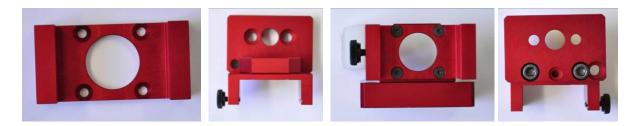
Camera holder (left) mounted on the adapter plate with the intermediate piece.
